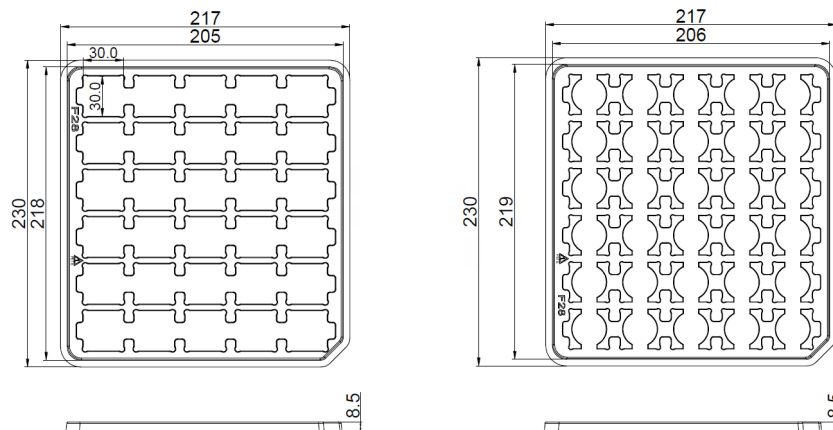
Tray dimensions for L2C6-xxxxxL11x22X0.
